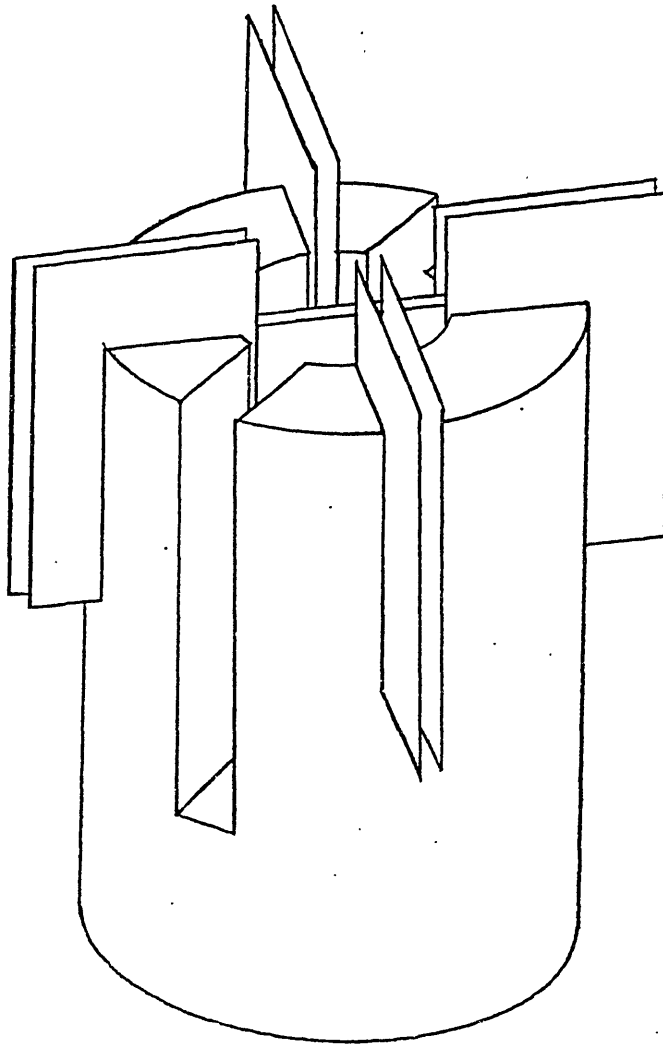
Placement of Nicoro Foil for Jig Assembly #2
